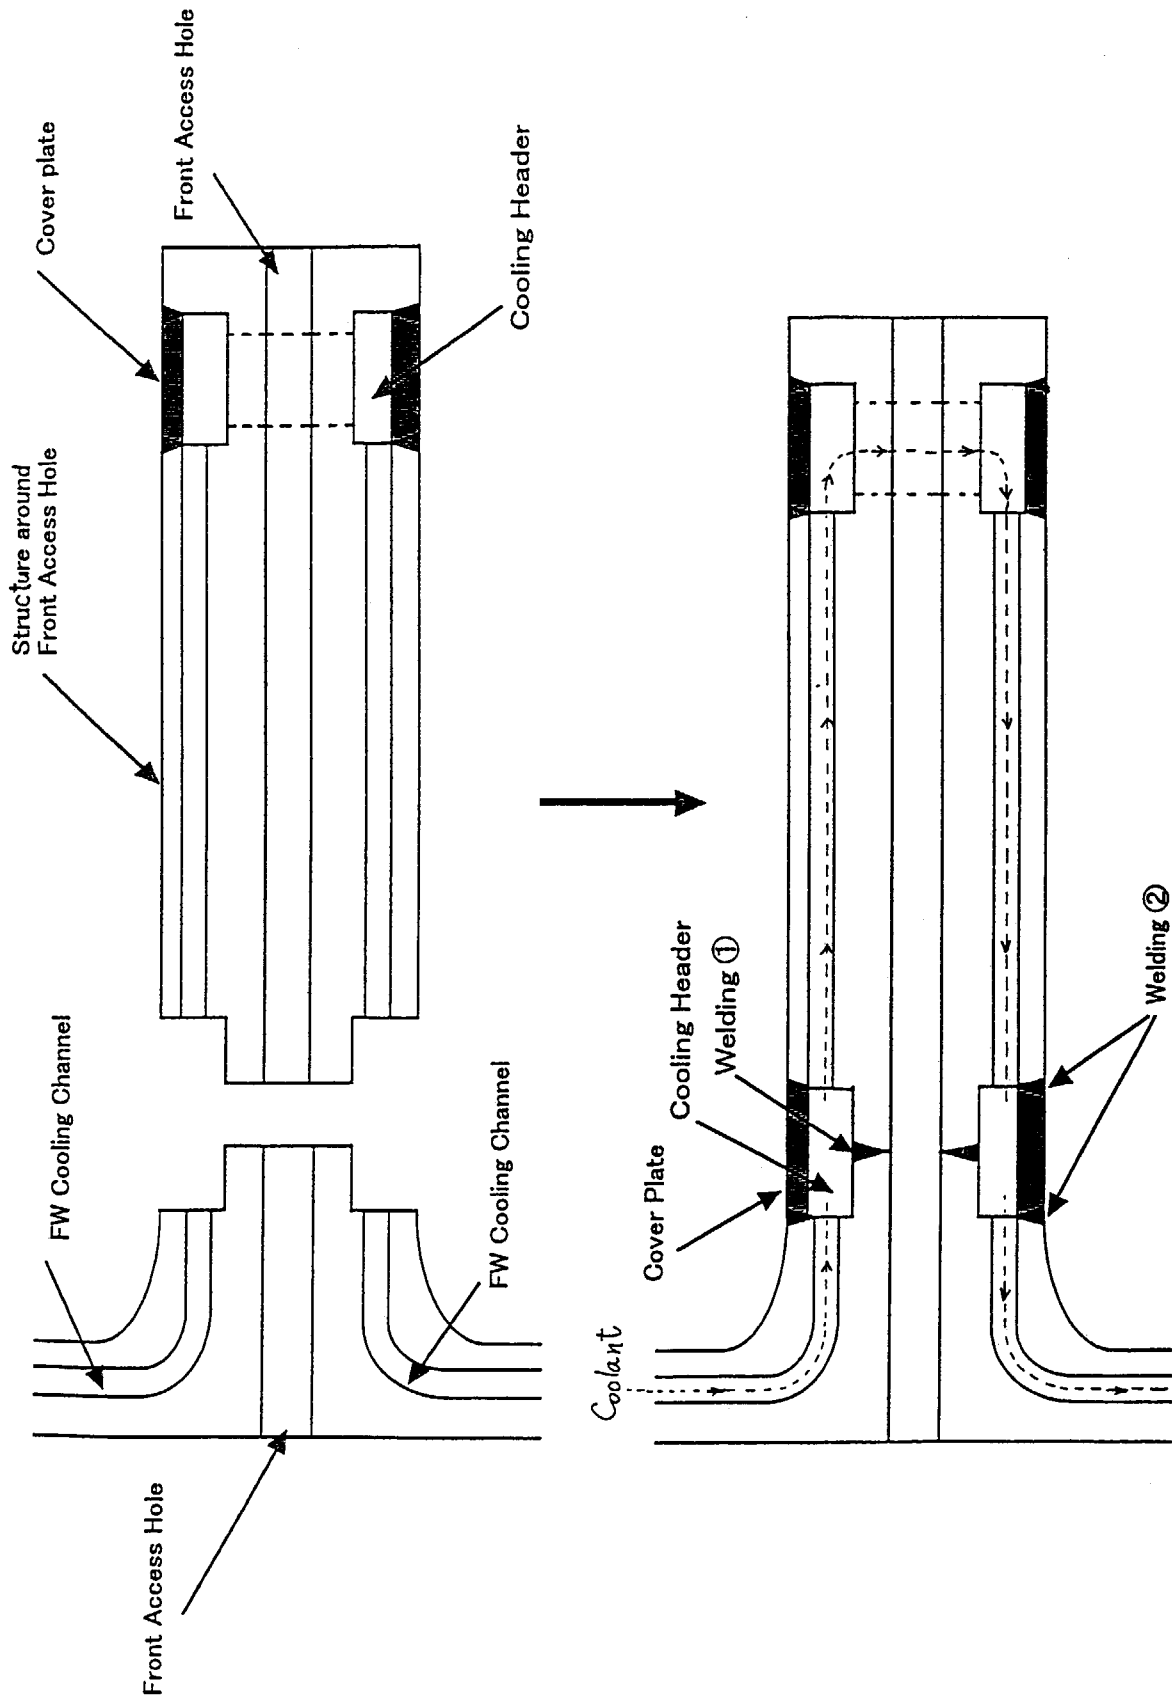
Coolant connection and welding of front access hole structure
